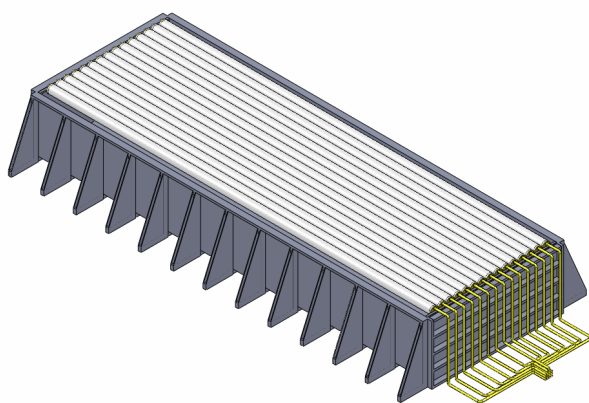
Tank assembly showing poly tubes and basic piping layout for delivering air.
